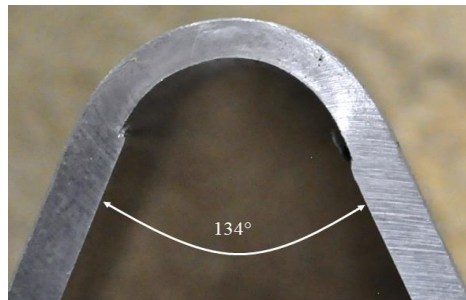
Fracture/ Defect Formed during Bending Test of Defective Friction Stir Welded Joints
